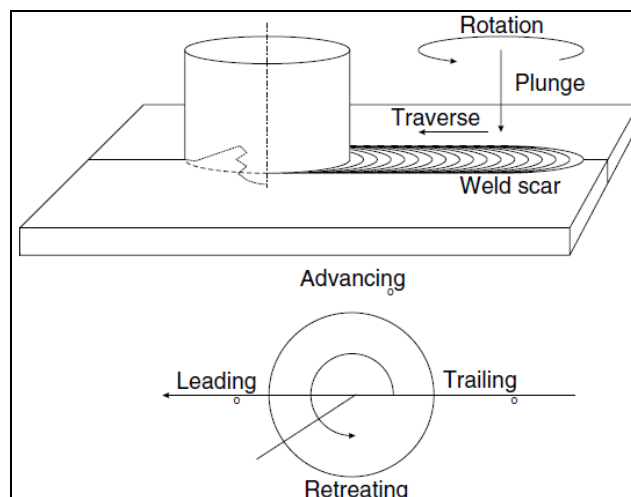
4. Orientations relative to the tool rotation and the welding direction
